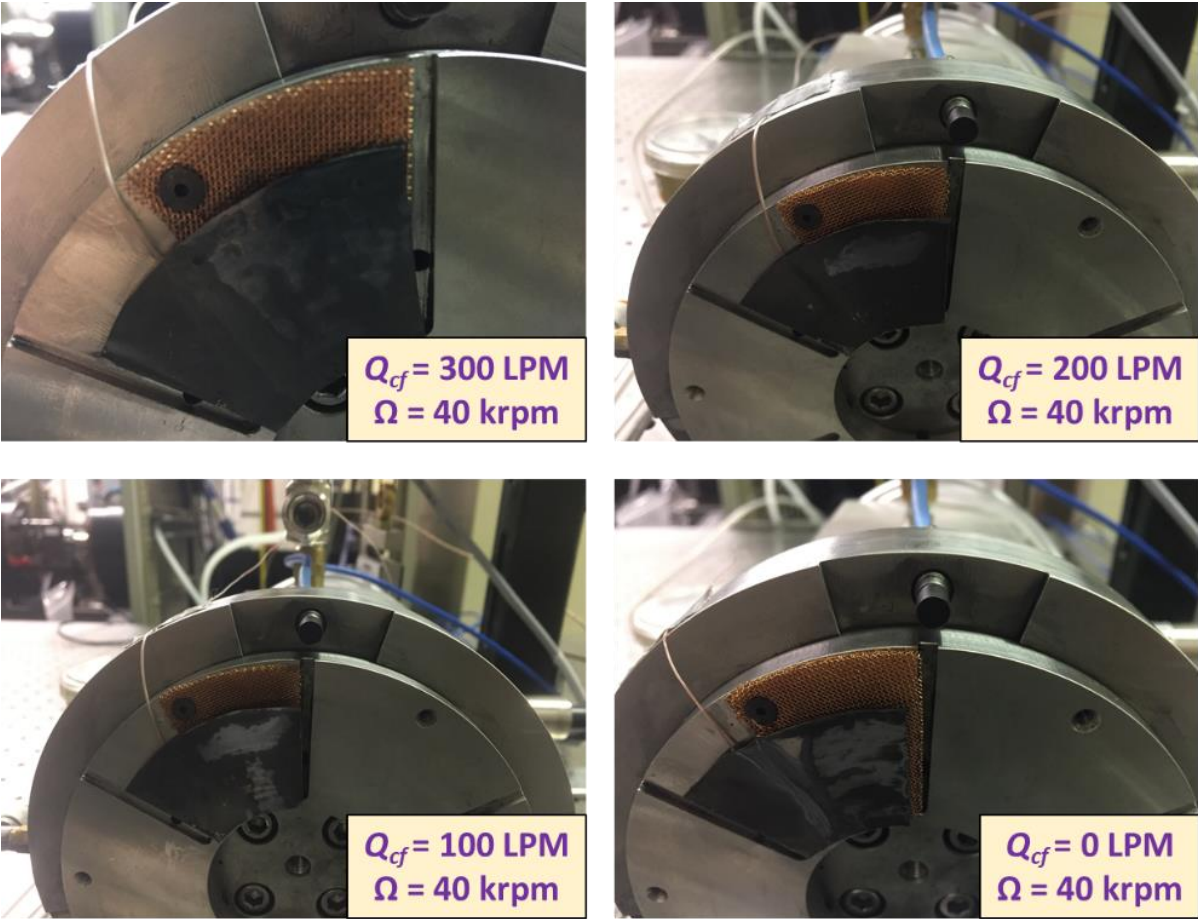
Post-test photographs of a single pad bearing with visible wear.
